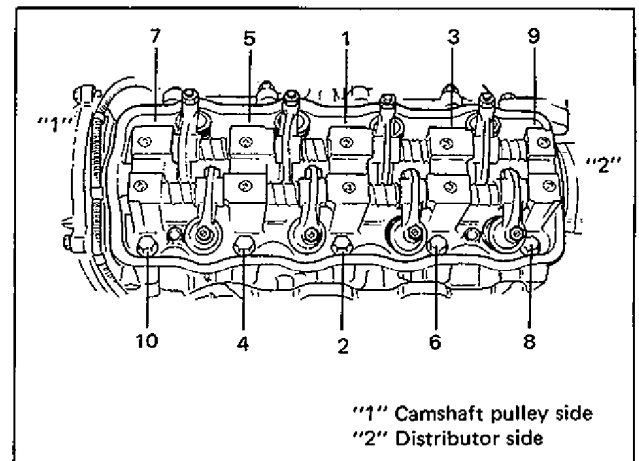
A-104 Tightening Sequence of Cylinder Head Bolts
